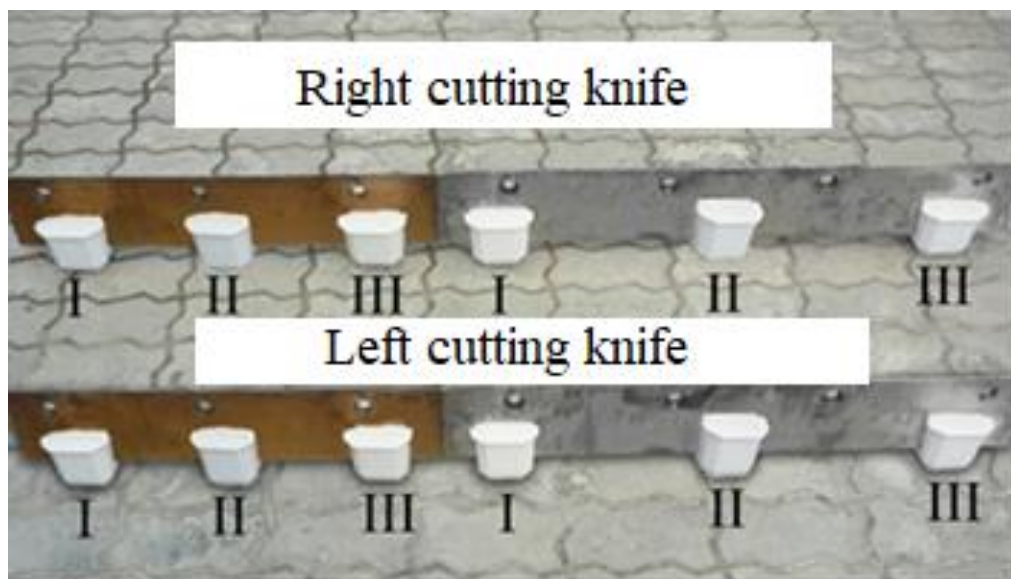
Plastic molds with medium cutting knives before testing on the motor grader DZ-180.
